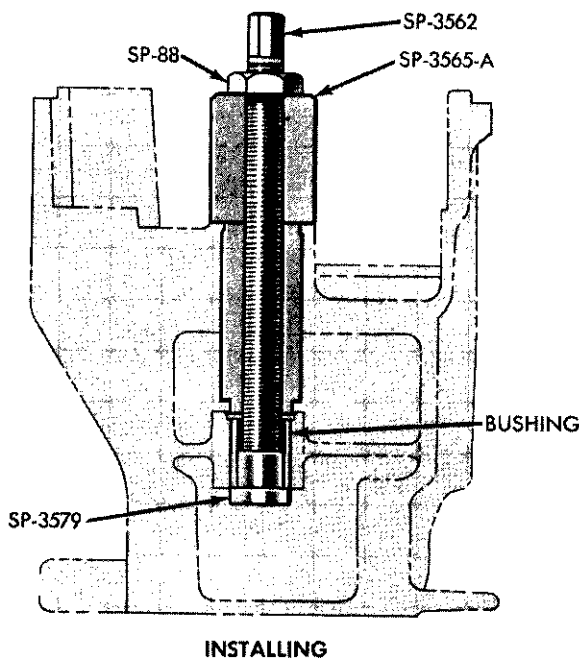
Removing and Installing Pinion Bushing Armature Shaft Bushing
